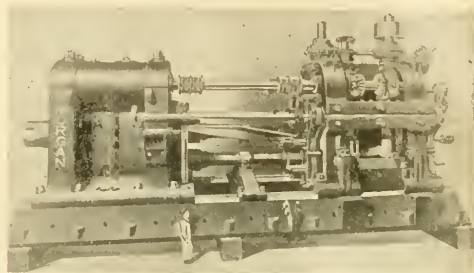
60 INCH UNIVERSAL PLATE MILL
